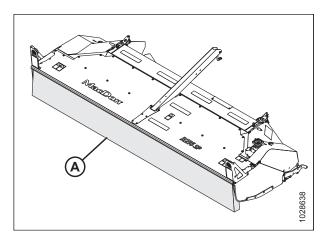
Cutterbar Curtain – Header with Conditioner Shown
